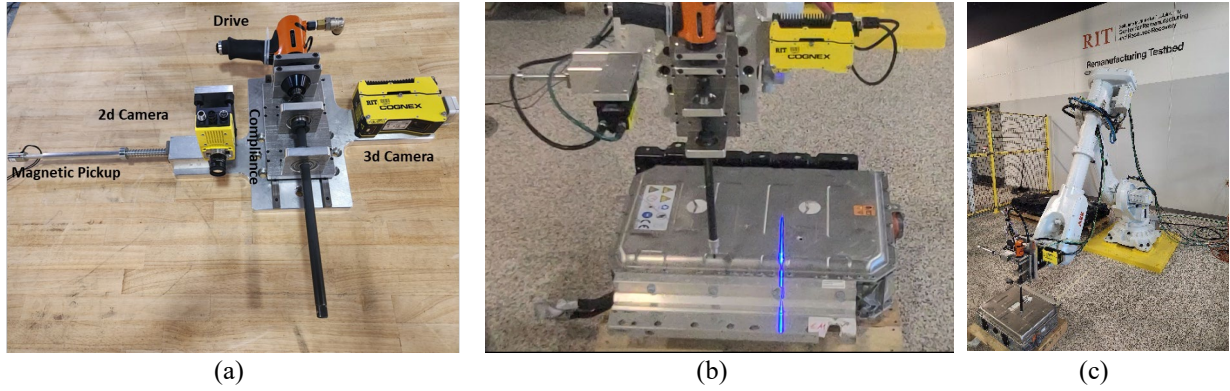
(a) Fastener removal End effector details (b) End effector mounted (c) Disassembly robotic cell.
